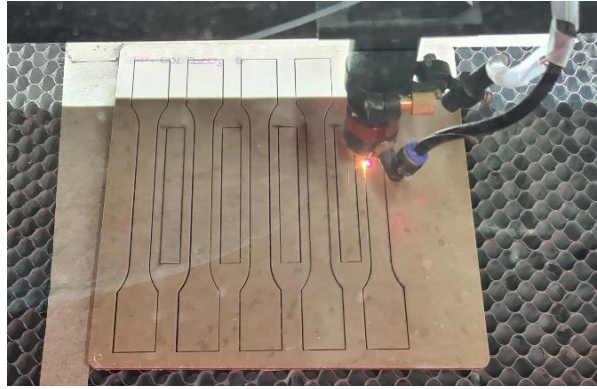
LASER CUTTING OF THE COMPRESSION MOULDED PLATES
